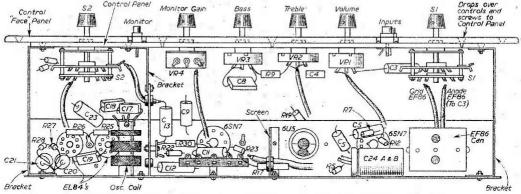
Front view of chassis, showing general layout of components and controls.
